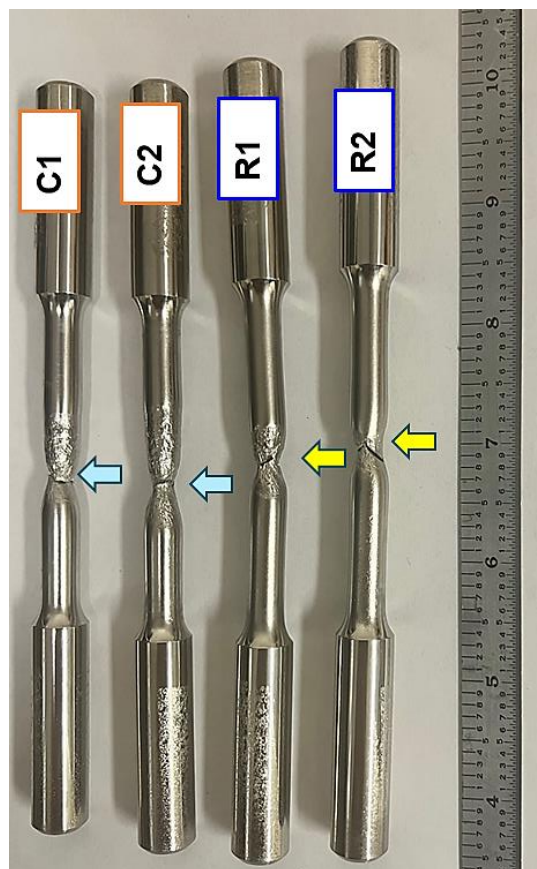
Photograph of the tested cross-weld tensile specimens from production weld W10
